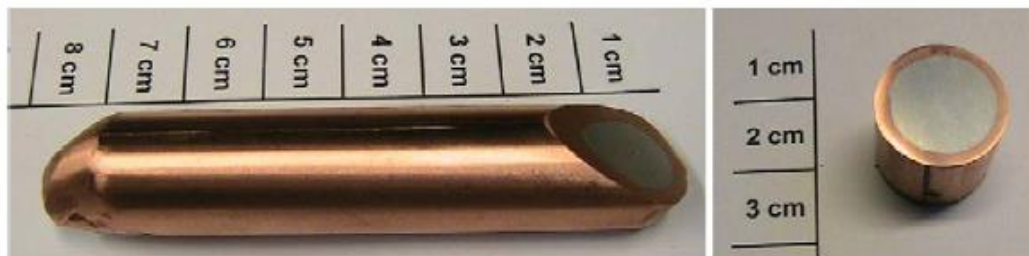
Views of the joint produced with one pass of ECAP results in the production of copper sheathed aluminum rods, left) side view, right) front view [34].
